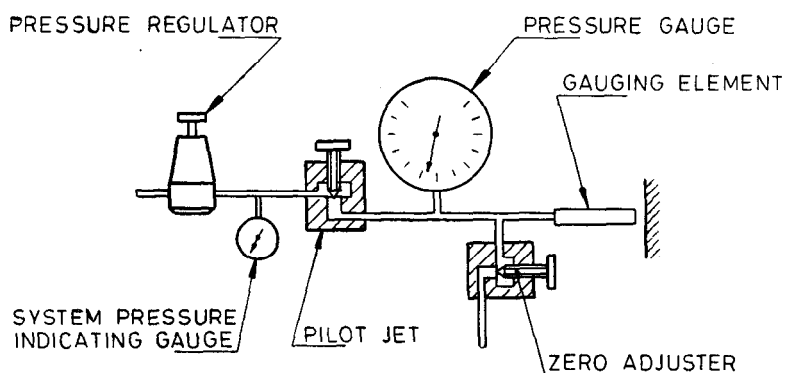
INDICATING INSTRUMENT USING THE PRESSURE MEASURING METHOD WITH A SIMPLE PRESSURE GAUGE
